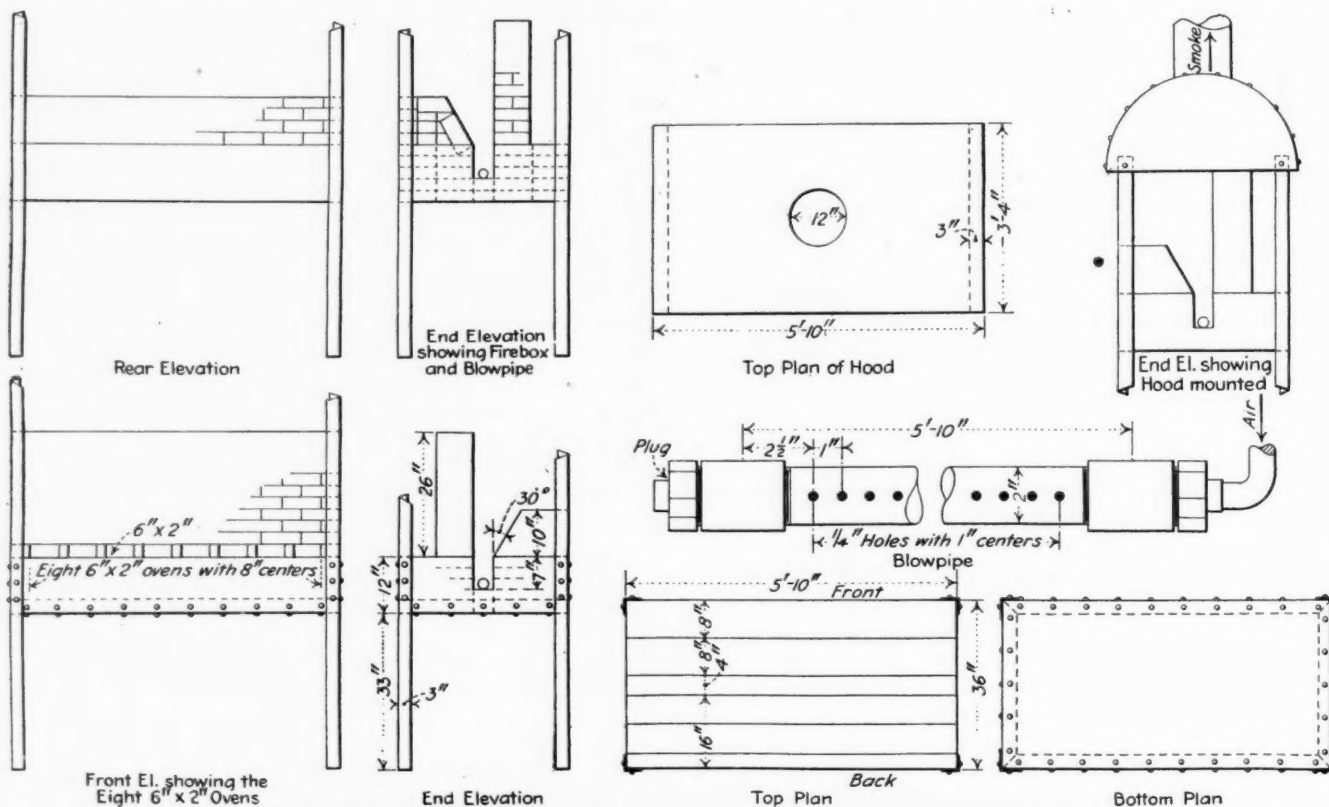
HEATING FURNACE FOR FORGING AND TEMPERING CUTTER BITS
